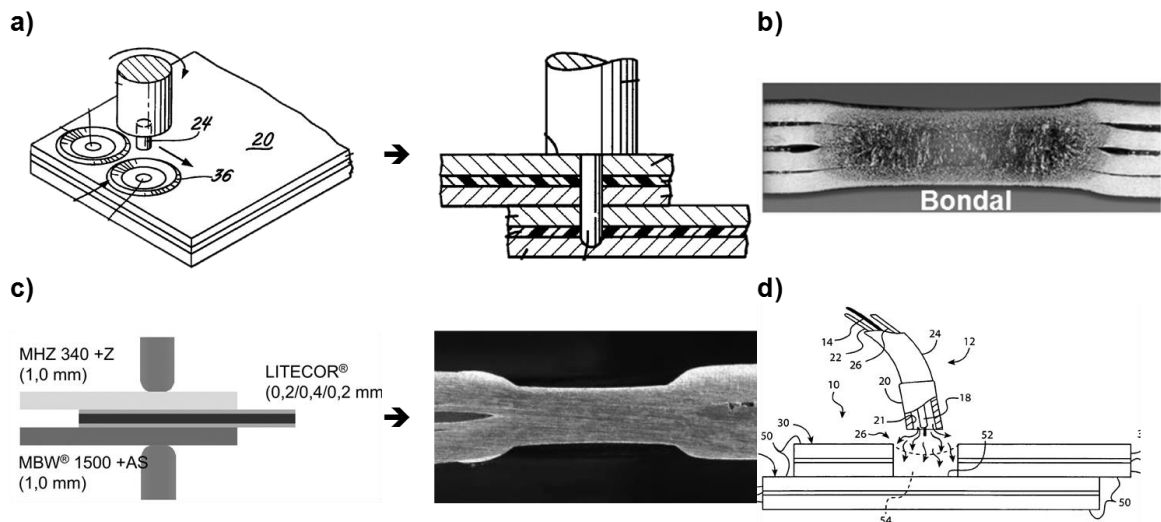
Welding possibility of MPM-laminates: a) friction stir welding [Che09], b) and c) resistance spot welding [Lau14, Thy09a] and d) gas metal arc welding [Fon13].
